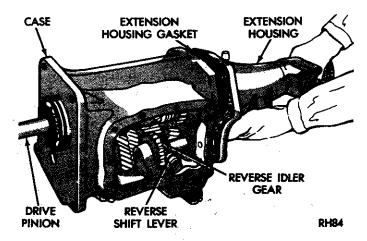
Removing/Installing Extension Housing And Mainshaft
